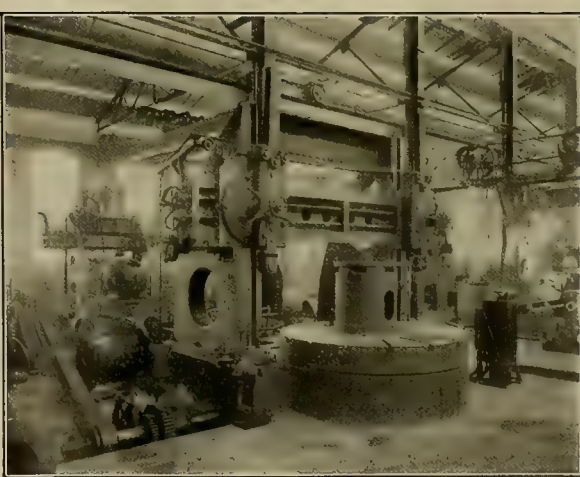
Boring Mill Equipped With Individual Motor Drive.
